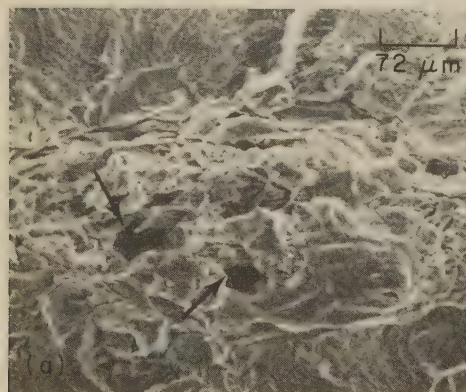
shows SEM fractographs of the surface of a fatigue fracture in a resistance spot weld that broke during bond testing of an aluminum alloy 7075-T6
